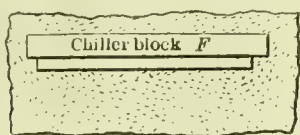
MOULD FOR CASTING A CHILLED PLATE.
